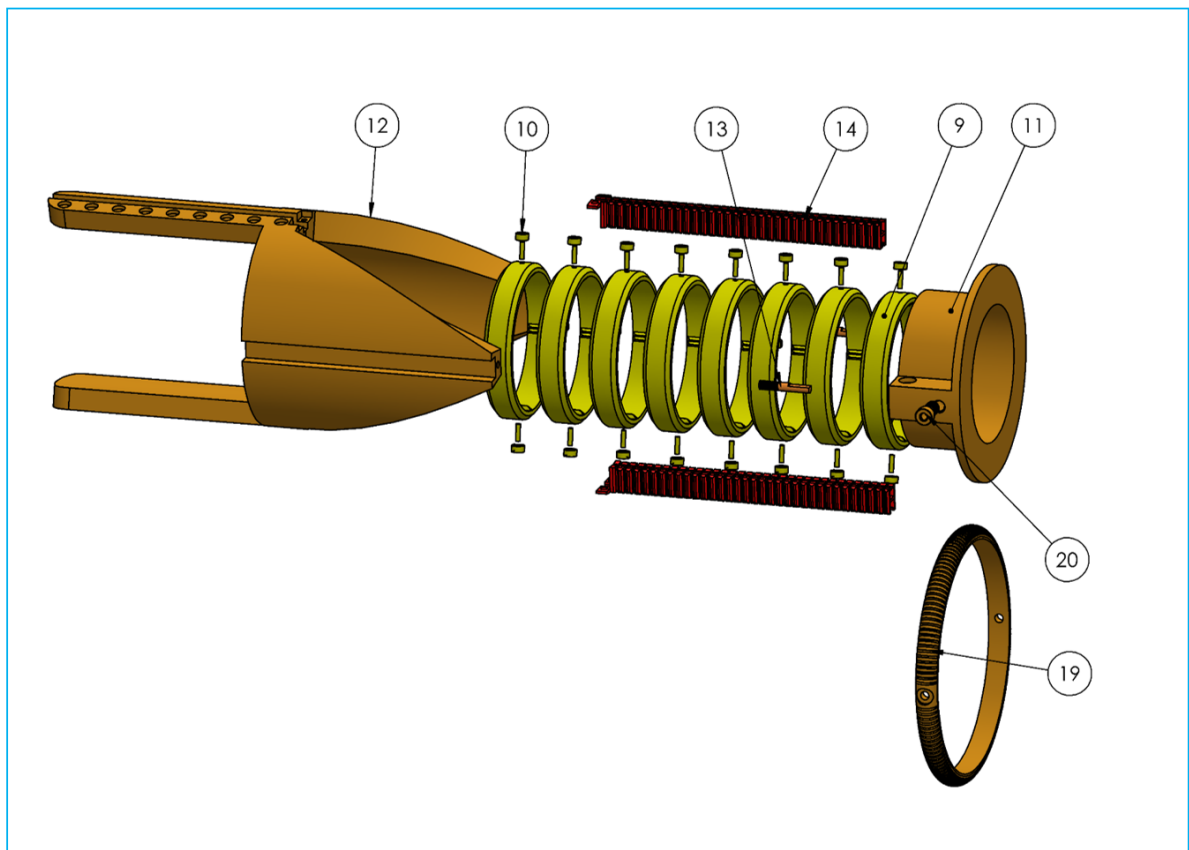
Exploded view of the memory rings with the translational motion mechanism
